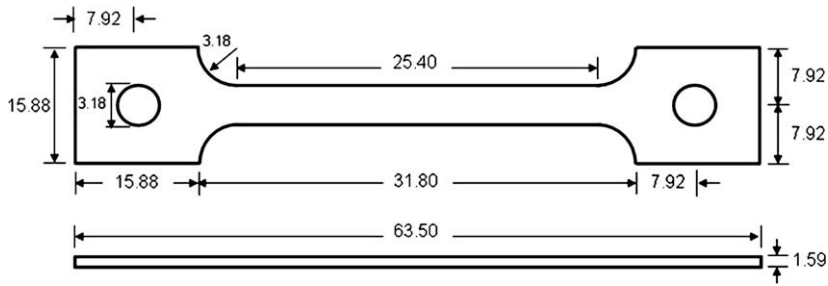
Geometry and dimensions (in mm) of the specimens used for in-plane uniaxial tensile testing.
